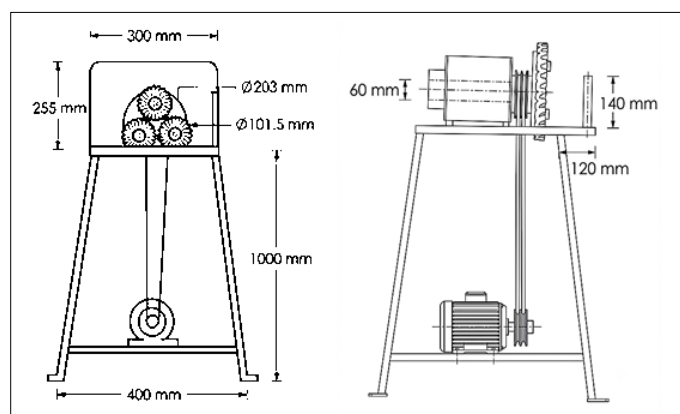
Front view and side view of Sugarcane Peeler-cum-cutter
